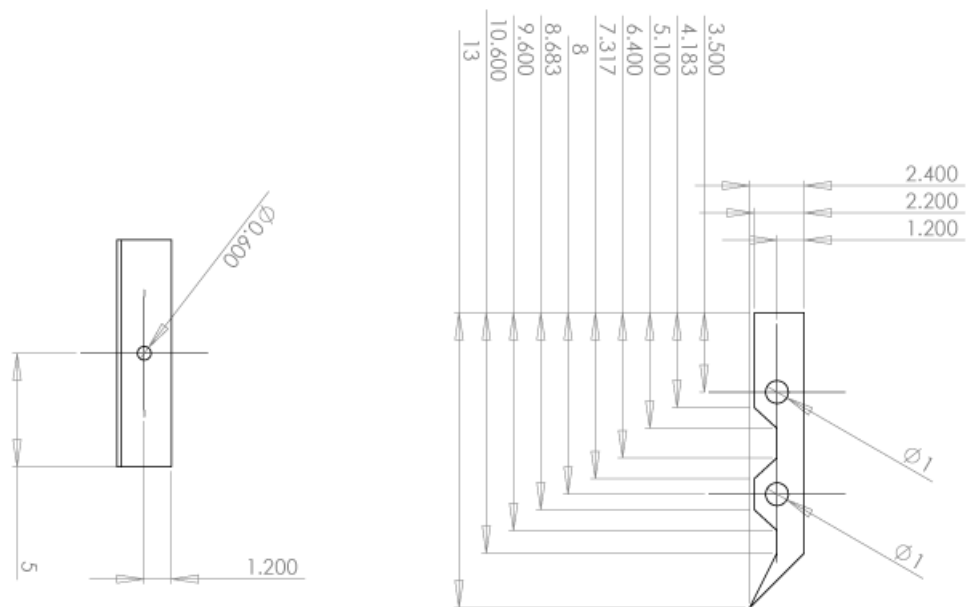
A SolidWorks drawing of one of the end cap electrodes.
